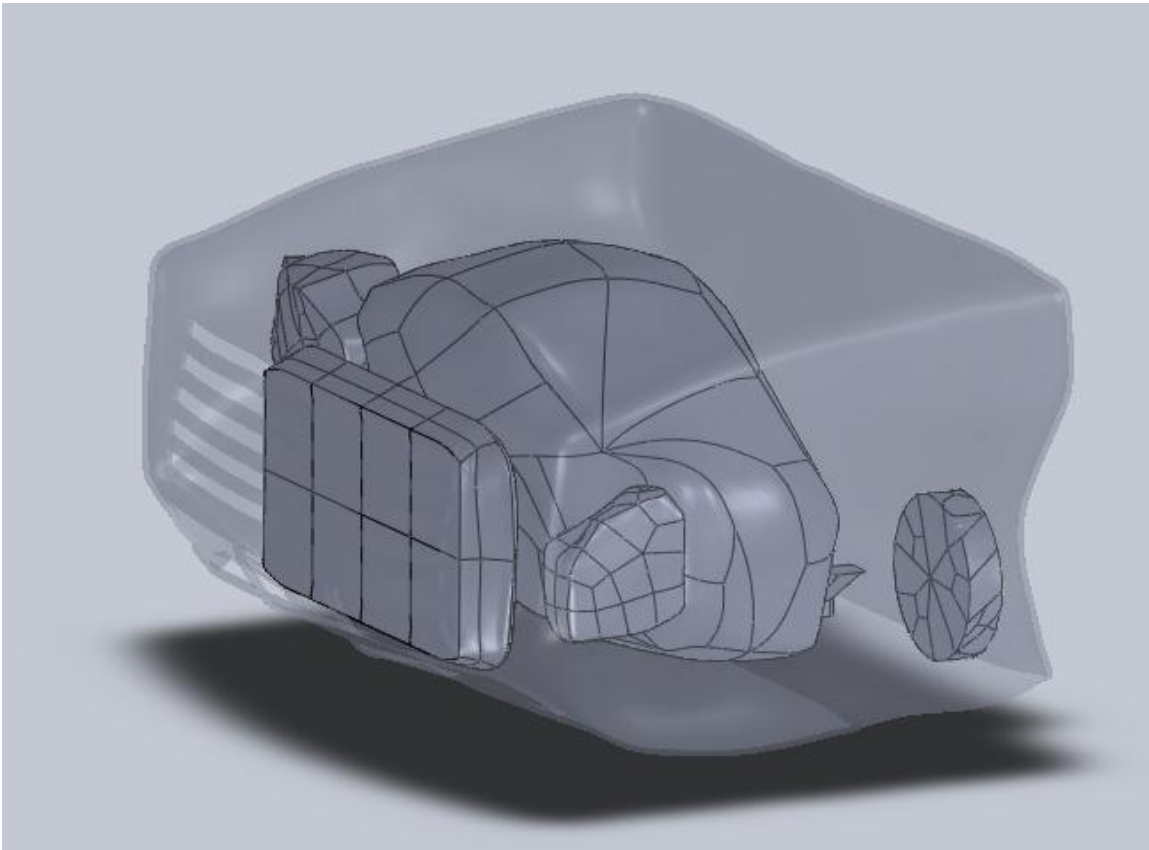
Initial Layout of the components in the car under hood with the radiator placed in front of the engine
